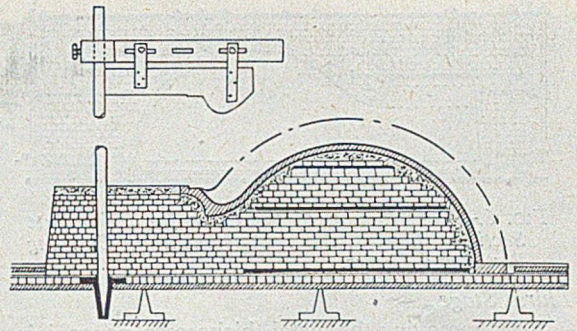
Section through the Mould, showing the added Metal Thickness and Flanges.
